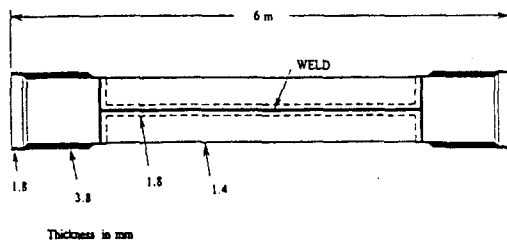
Schematic Diagram of the Seam-welded Calandria Tube with Thick Weld Region.
